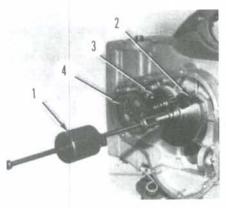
Use a slide hammer puller to remove balance weight assembly.
